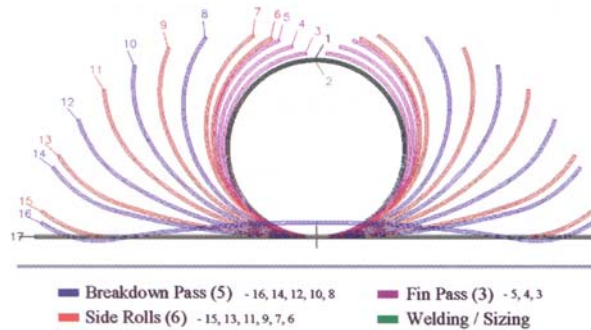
"Flower Pattern" Illustrating the Steps to Form a Tube
